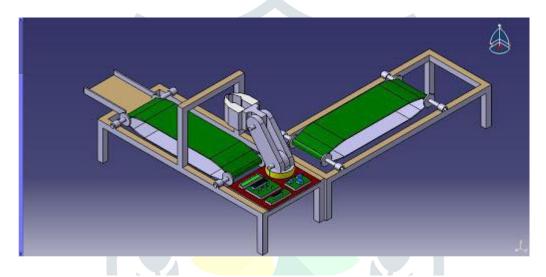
Assemble View of L-Shaped Automated Conveyor Belt with Robot Arm
